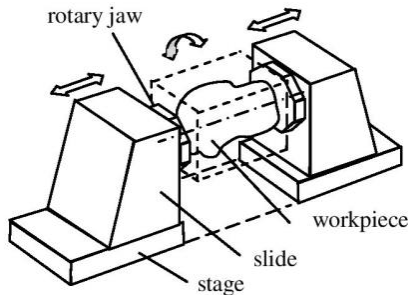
Basic concept of a single vise in the Dual-Dexterous-Vises system [21].
